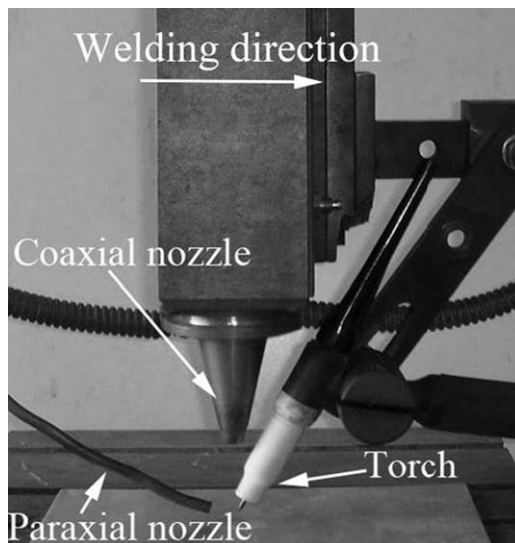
Schematic setup of CO₂ laser-TIG hybrid welding.
